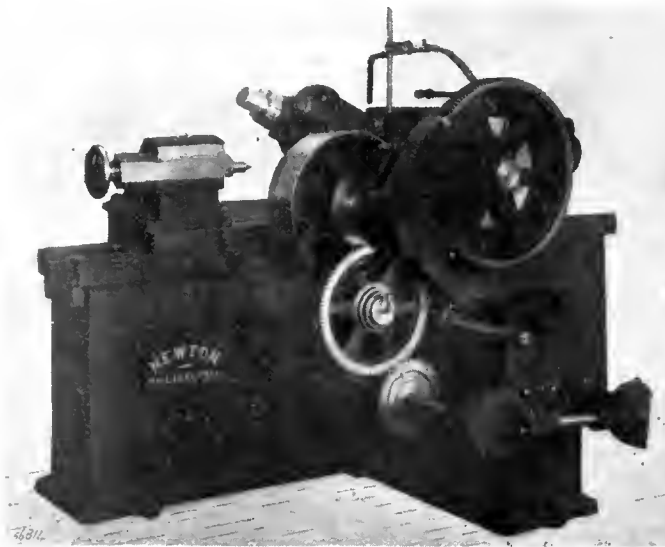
REAR VIEW OF WORM MILLER SHOWING BELT PULLEY AND DRIVING GEARS.
